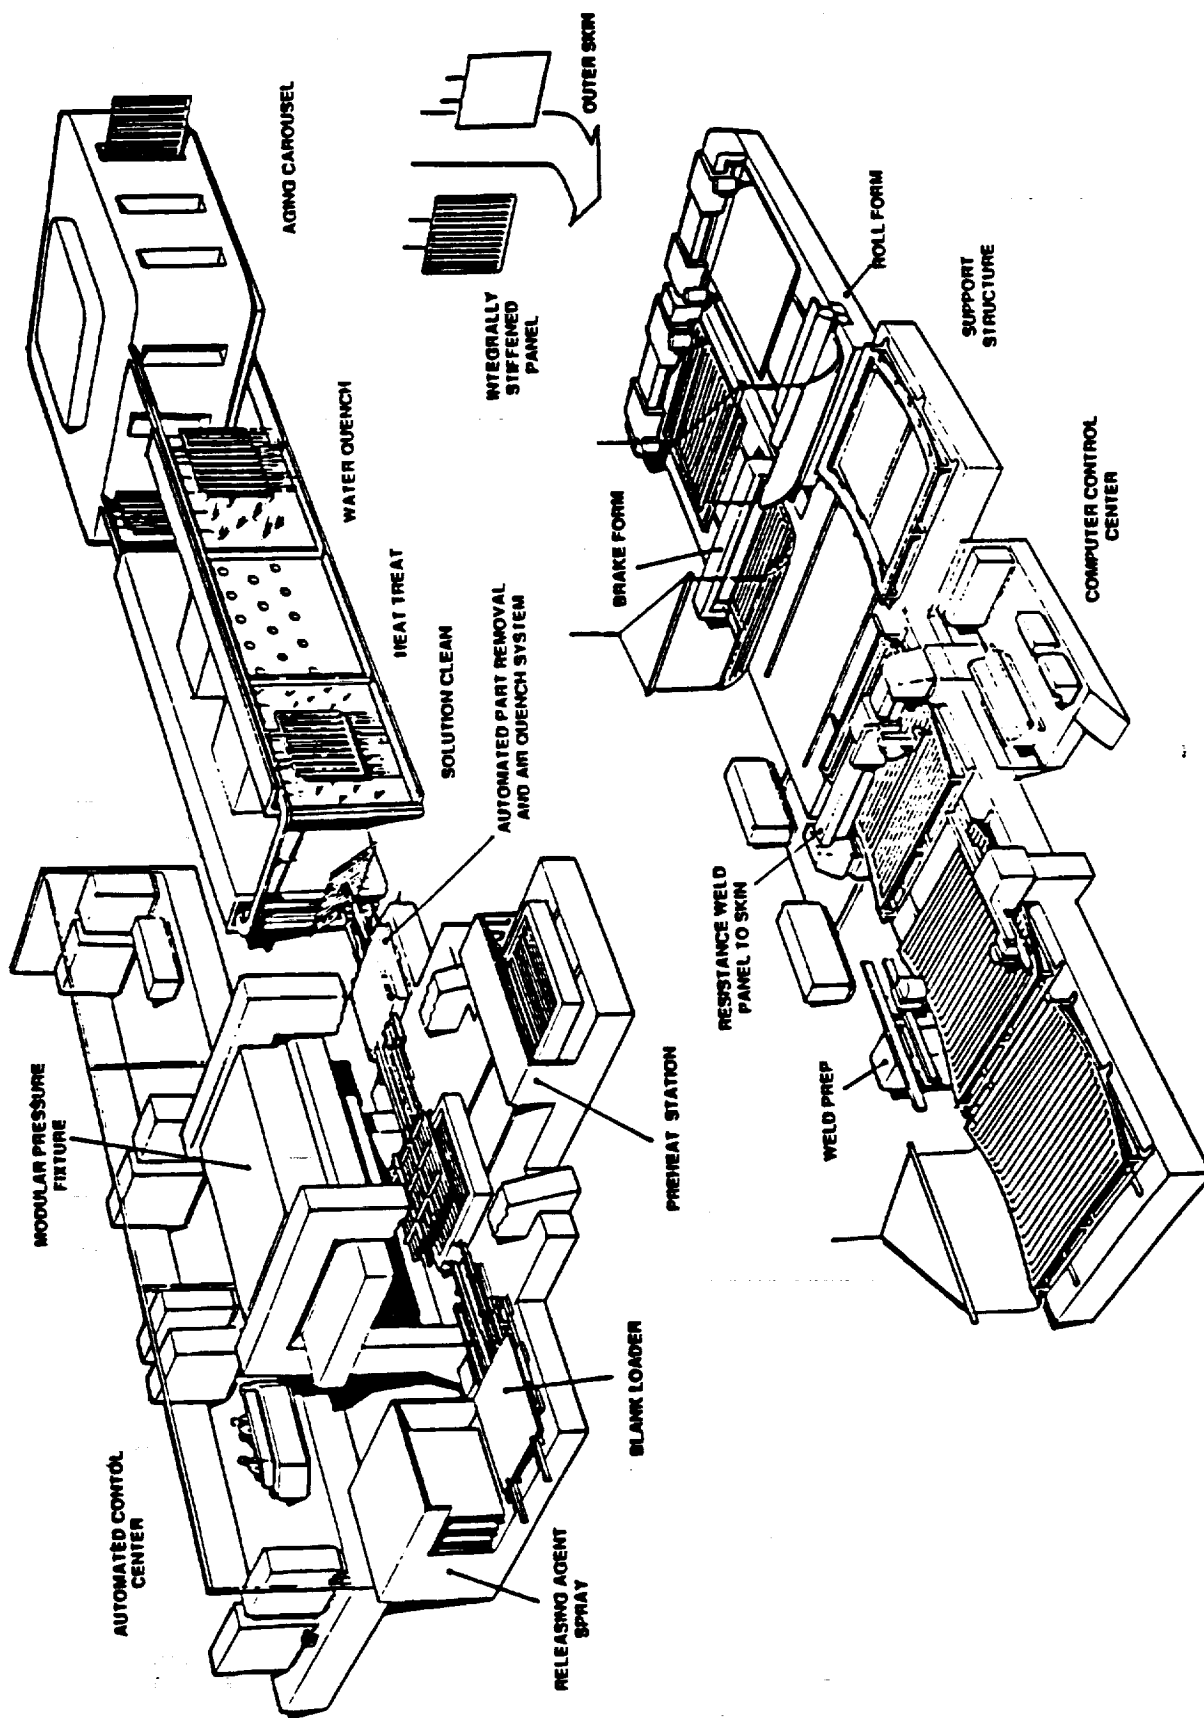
Heat Treatment, Trimming and Welding of Stiffened Panel to Outer Skin.
